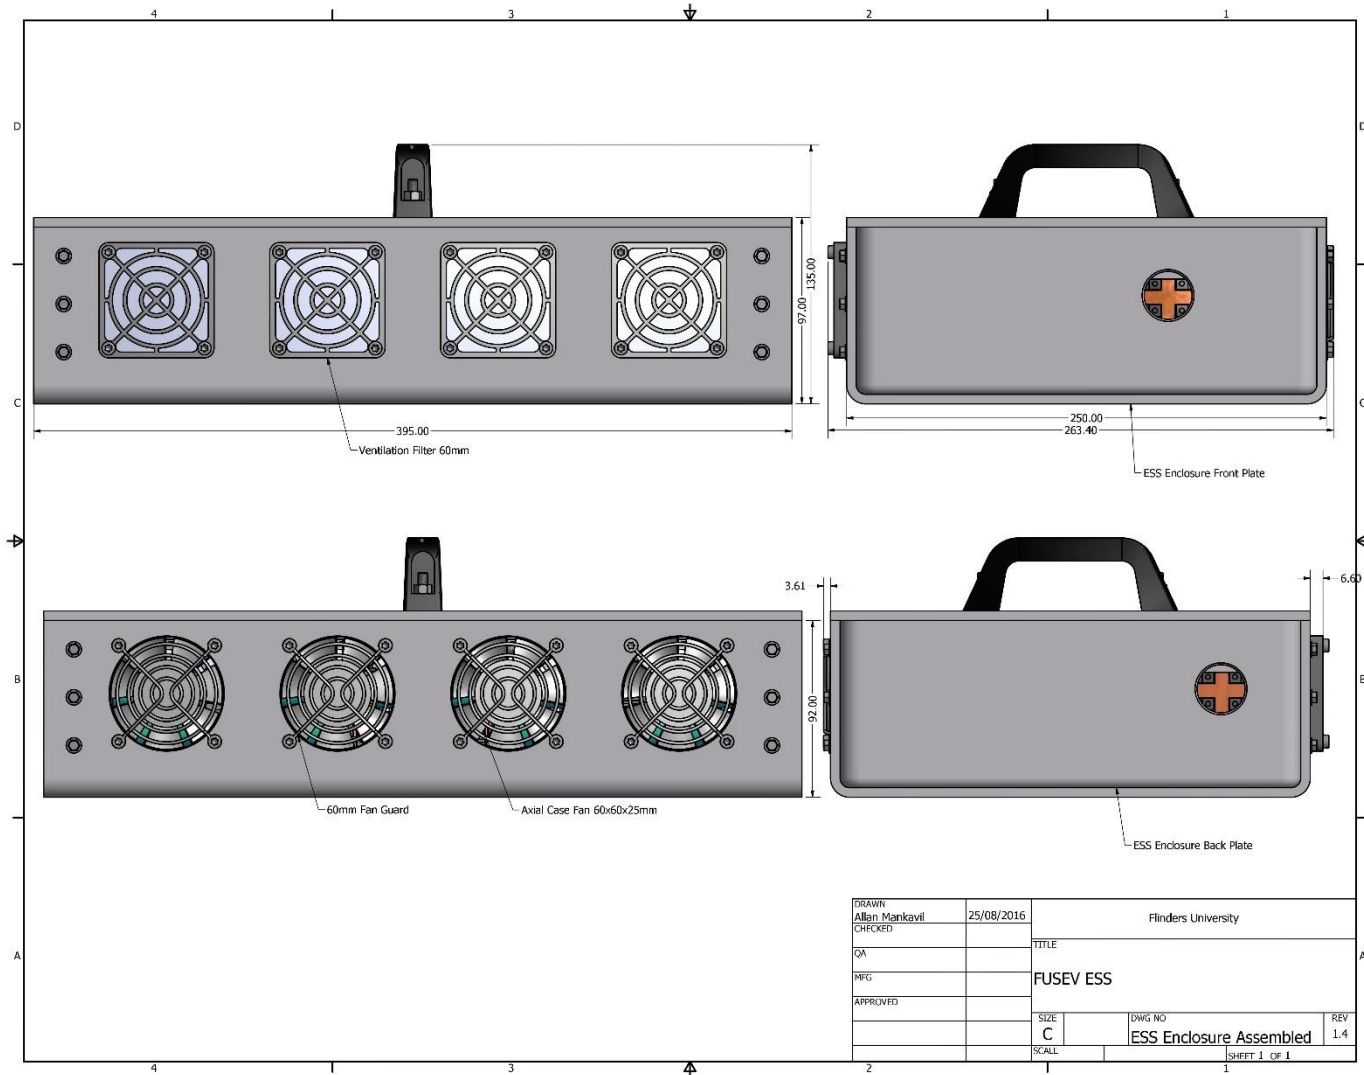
The mechanical drawing of the ESS Enclosure with BARR and Fixtures, showing external component placement and installation.
